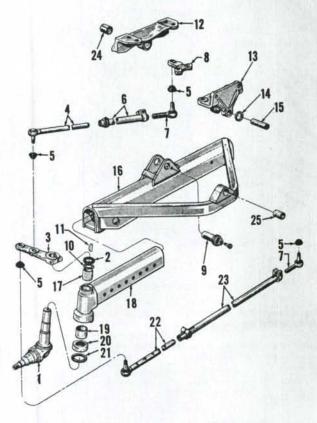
A - Exploded view of the all purpose frost axle and associated parts.
